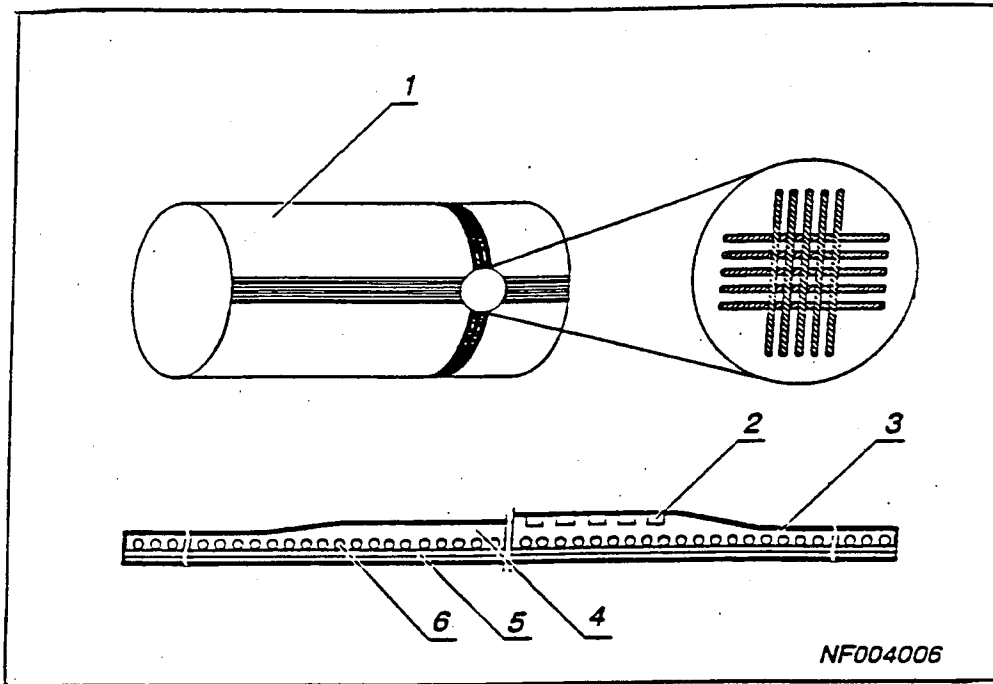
5 View and cross-section of QualiFlex press sleeve
